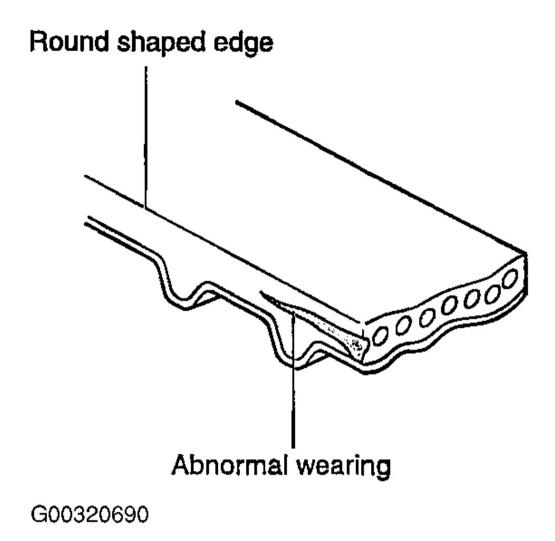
Testing Timing Belt For Side Face Wear Courtesy of KIA MOTORS AMERICA, INC.
